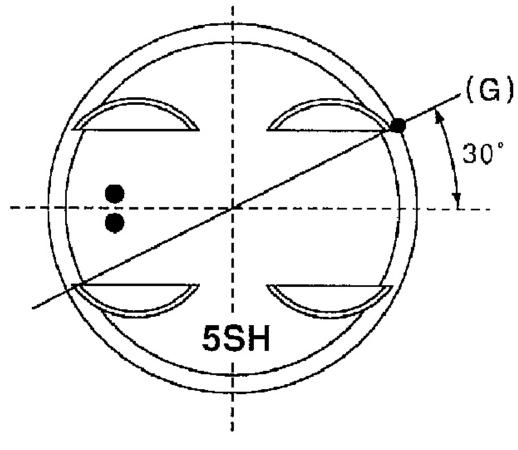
Aligning Lower Rail Spin Stopper With Piston Side Surface Hole Courtesy of SUBARU OF AMERICA, INC.
